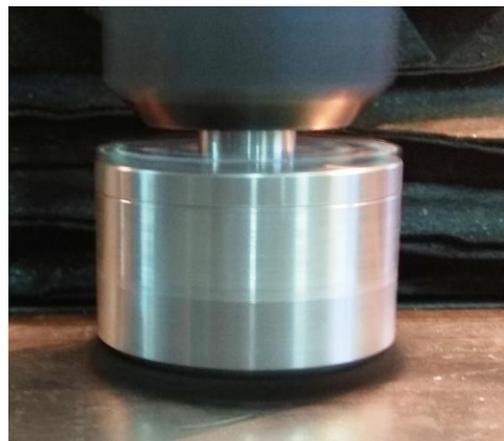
The end head in working condition on the machine during machining of the flat workpiece
